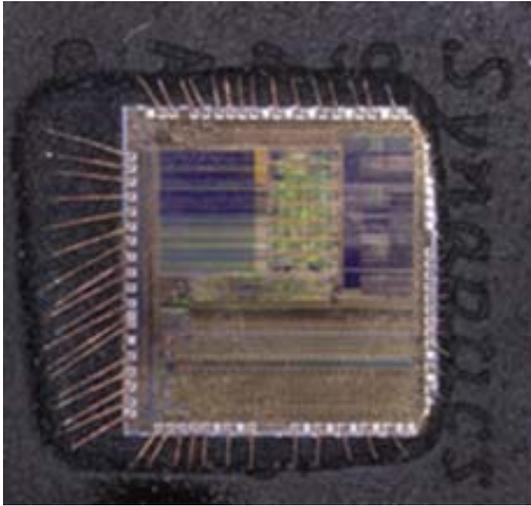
Chemical decapsulation performed on a package mounted on a flex cable while the phone stayed fully assembled
